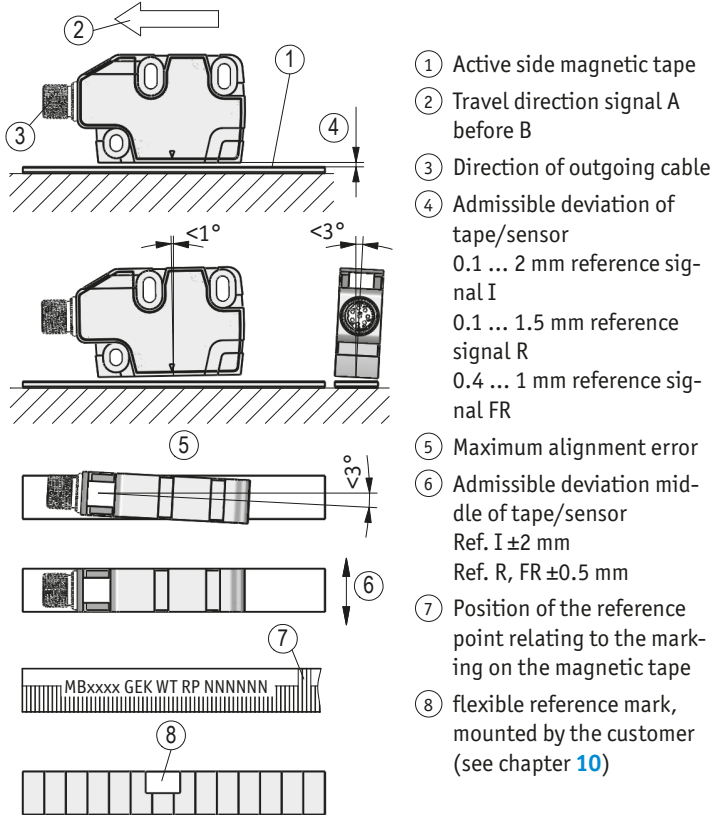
Definition of the counting direction with magnetic tape and assemblage sensor / magnetic tape, gap measure, tolerances
